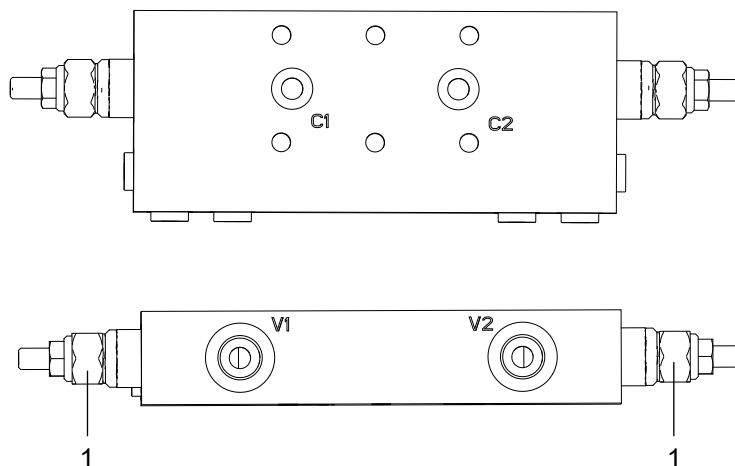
Oscillating counterbalance valve (PN.202040003786)
